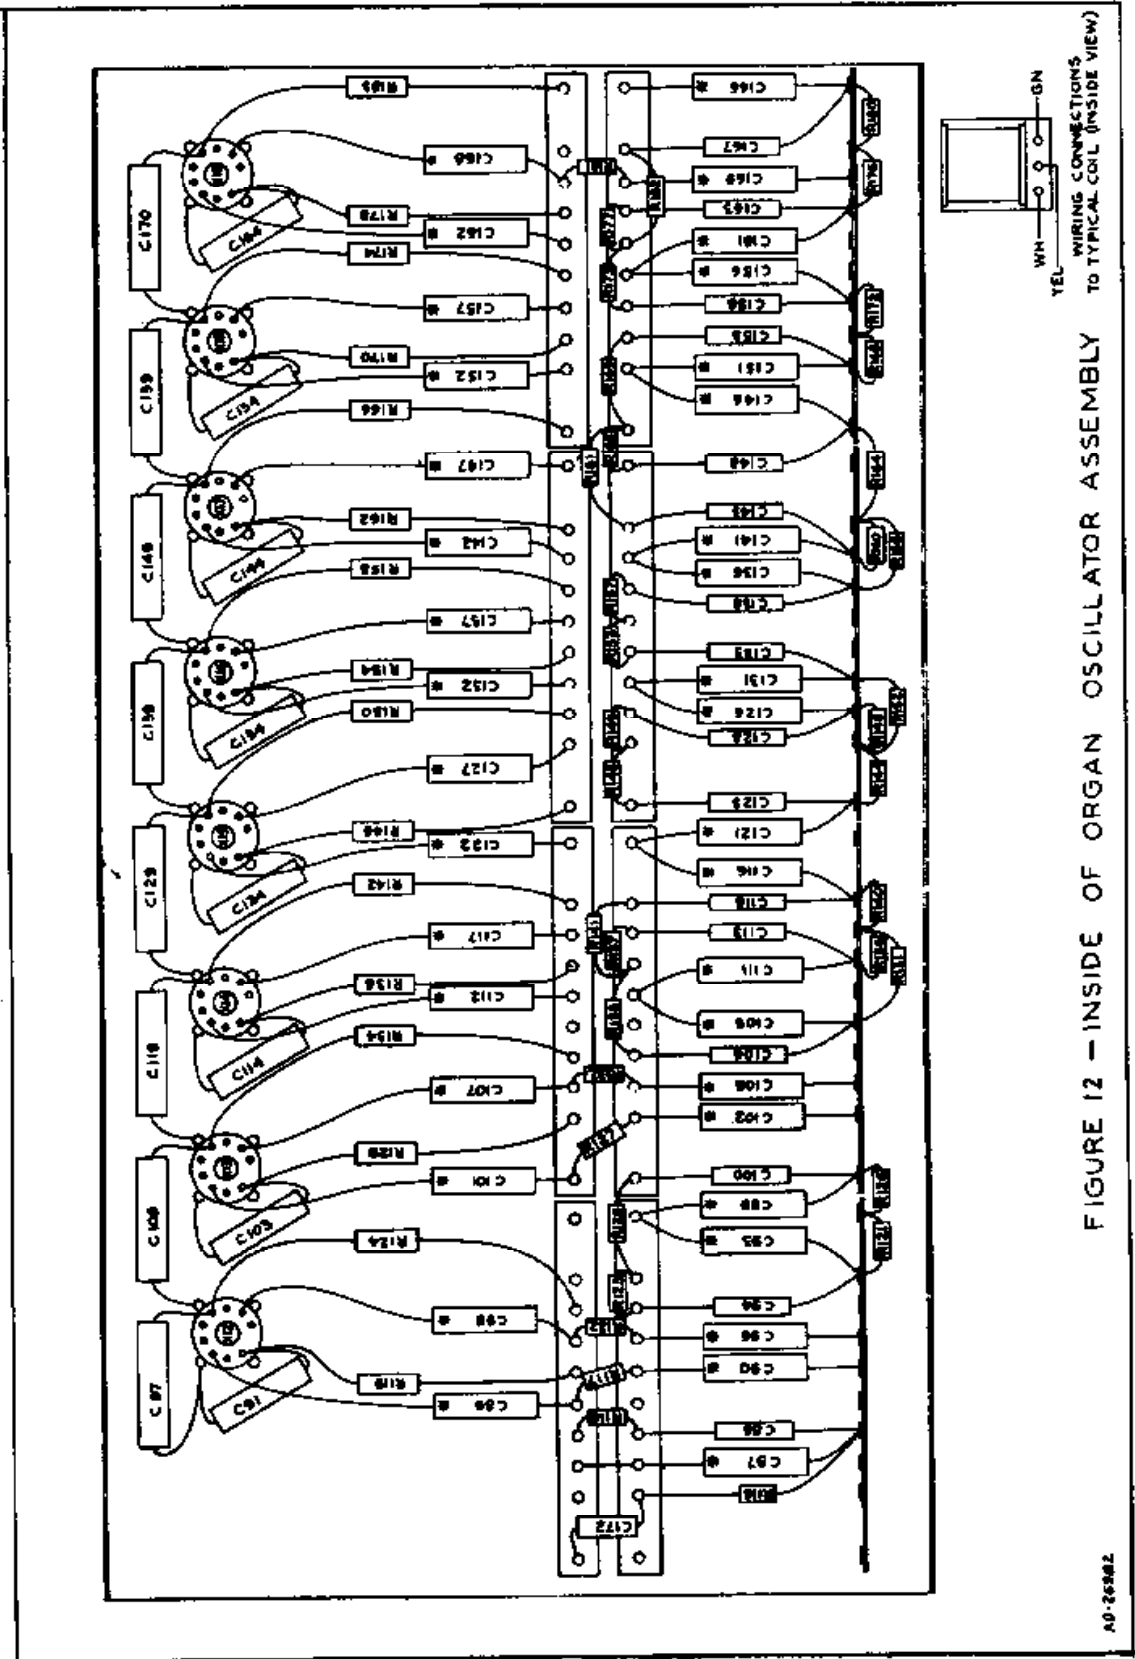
INSIDE OF ORGAN OSCILLATOR ASSEMBLY
